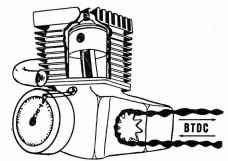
View of typical degree wheel installation for checking ignition timing. Degree wheel can also be used for checking rotary valve timing and piston portopening.
